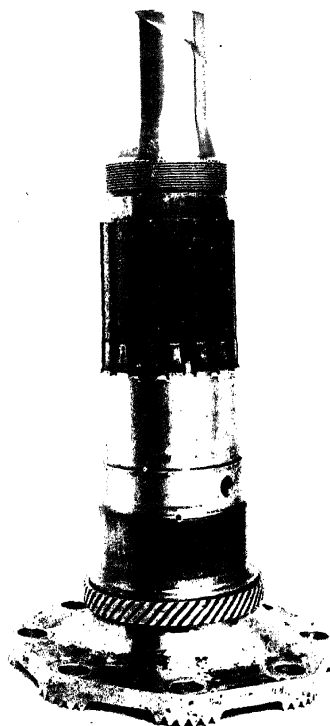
Bramo Fafnir 323P airscrew shaft.
